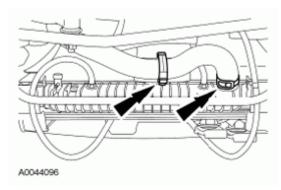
Locating Lower Radiator Hose And Hanger Courtesy of FORD MOTOR CO.
